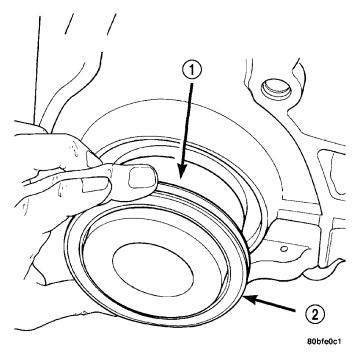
Rear Crankshaft Seal and Special Tool 6926-1
